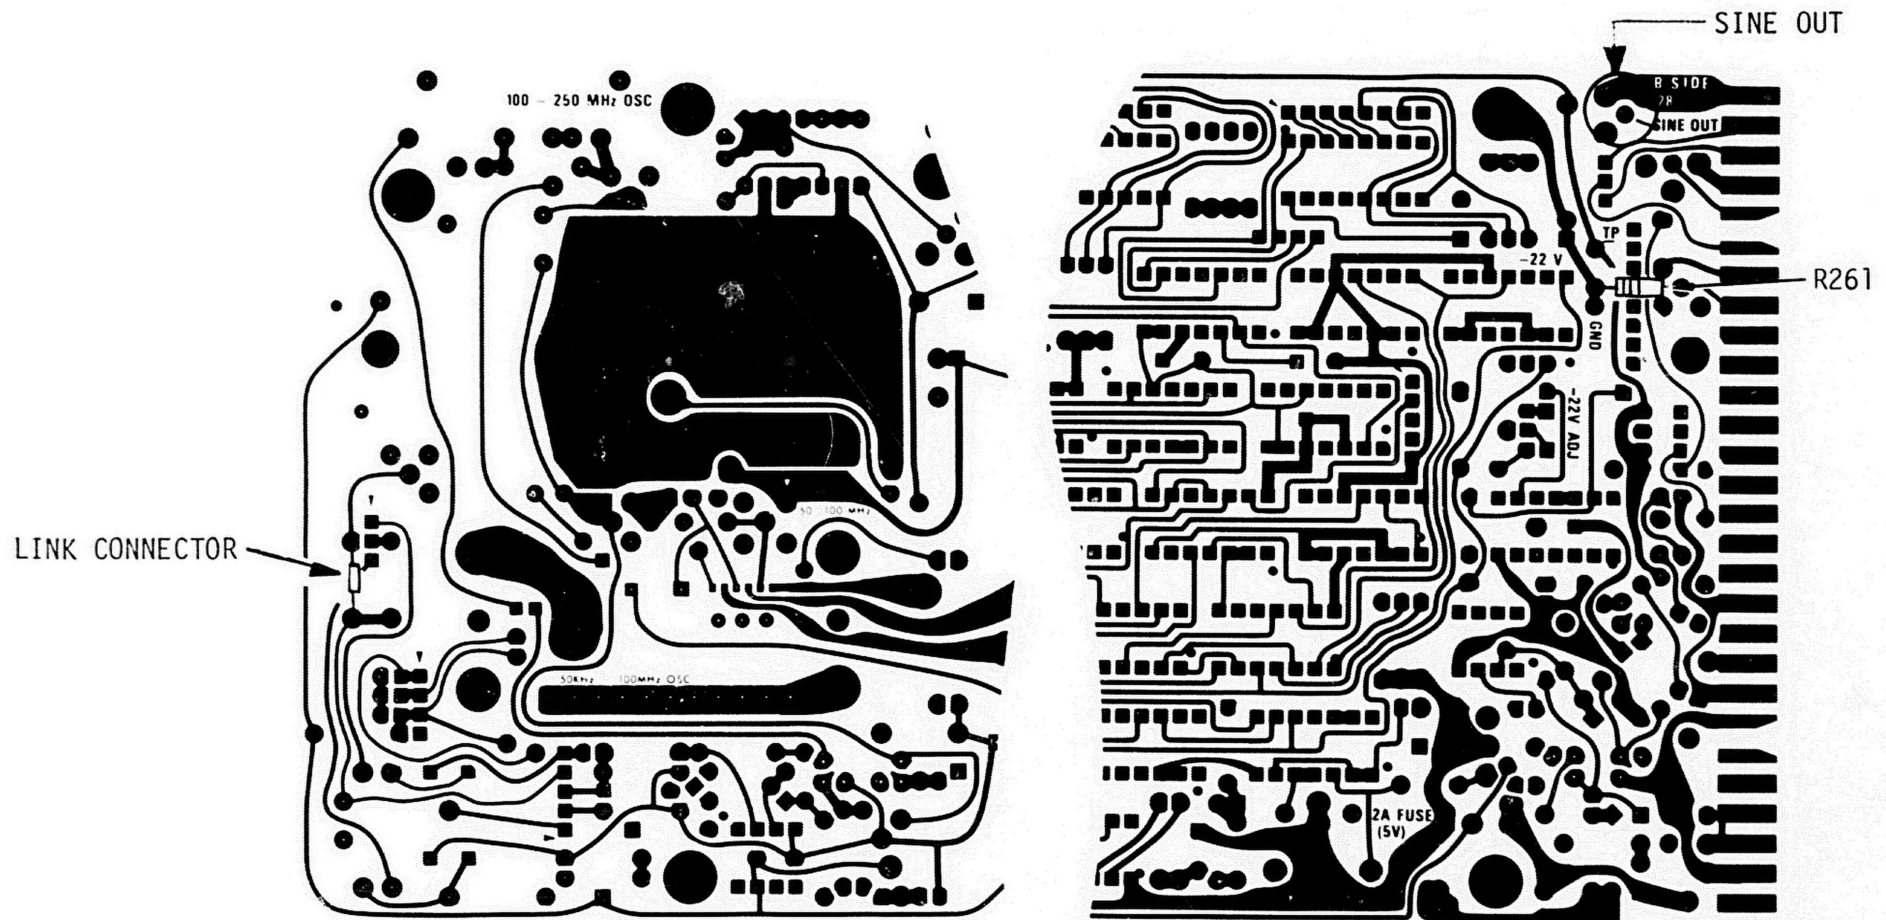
PARTIAL MAIN CIRCUIT BOARD (BACK)
